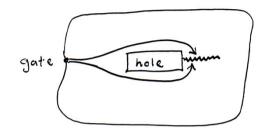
Cold flow fronts recombine to make a visible line that can be mechanically weak.
